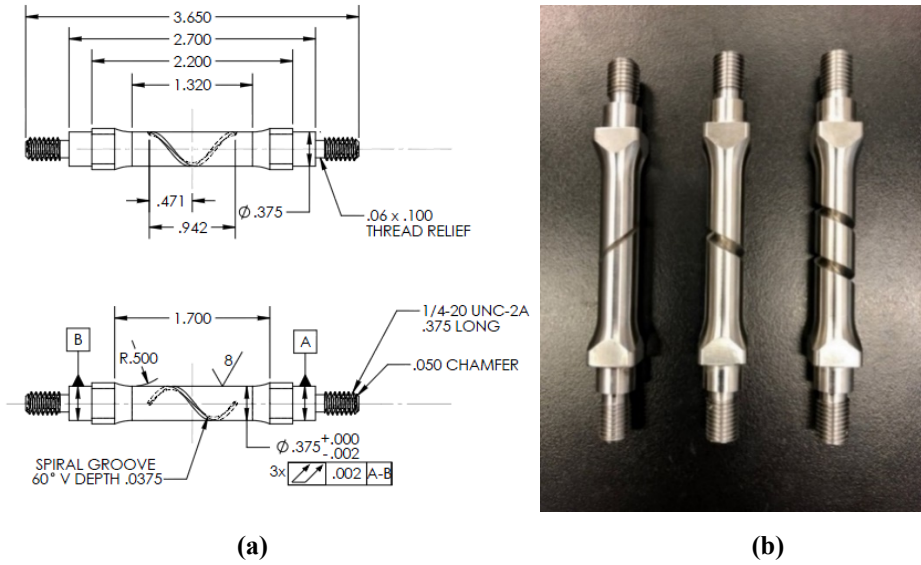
(a) Geometry details of the SS304/308 weld steel SNTT specimen; (b) SNTT specimens with different spiral groove designs, (left) single loop spiral groove with 0.953-mm (0.0375”) notch depth, (middle) single loop with 2,54-mm (0.100”) notch depth, (right) two loops with 2.86-mm (0.1125”) notch depth.
